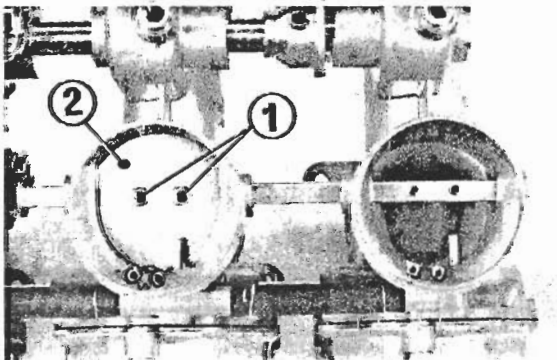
(1) Screws (2) Choke valve (3) Tube
